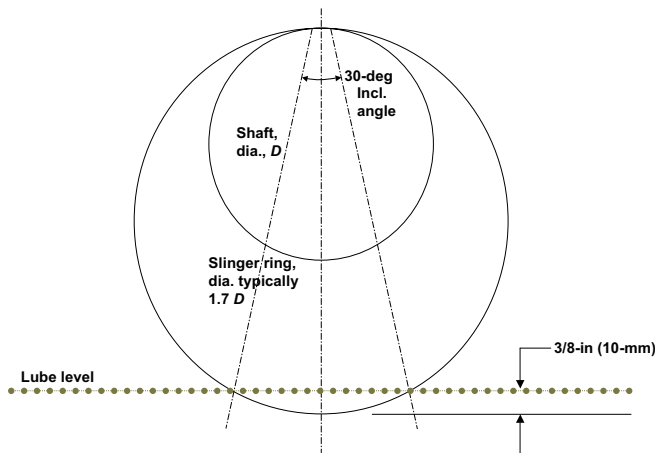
Typical oil ring ("slinger ring") dimensions of interest.
